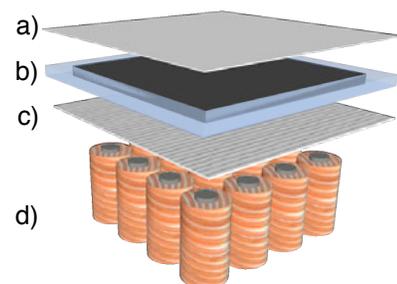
Exploded view of system design: a) latex touch & projection surface, b) MR fluid pouch, c) resistive touch input pad, d) array of electromagnets (projector omitted in this schematic).
